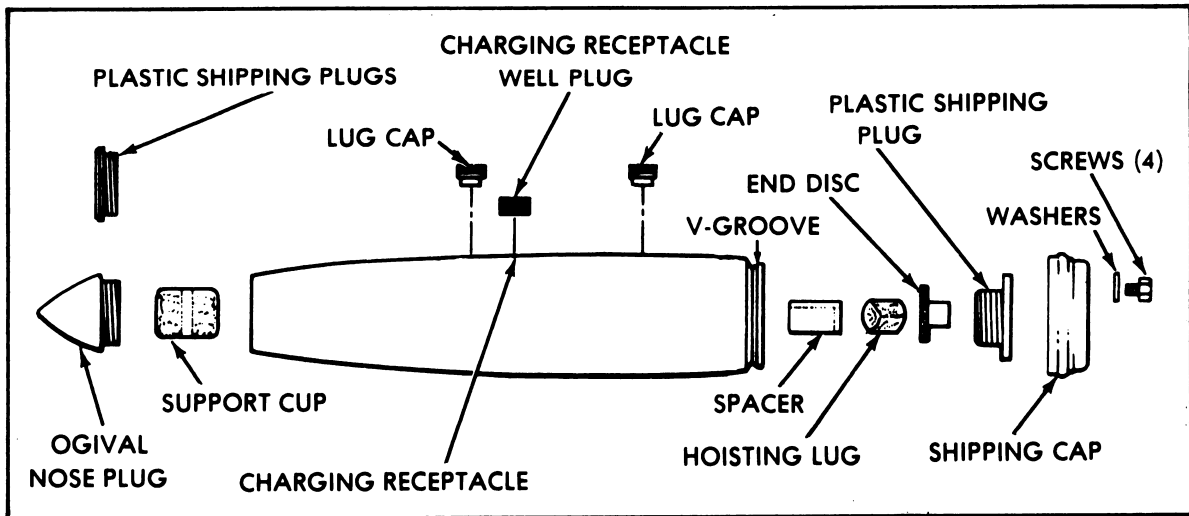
Exploded view of LDGP Mk 80 series bomb in a shipping configuration.
